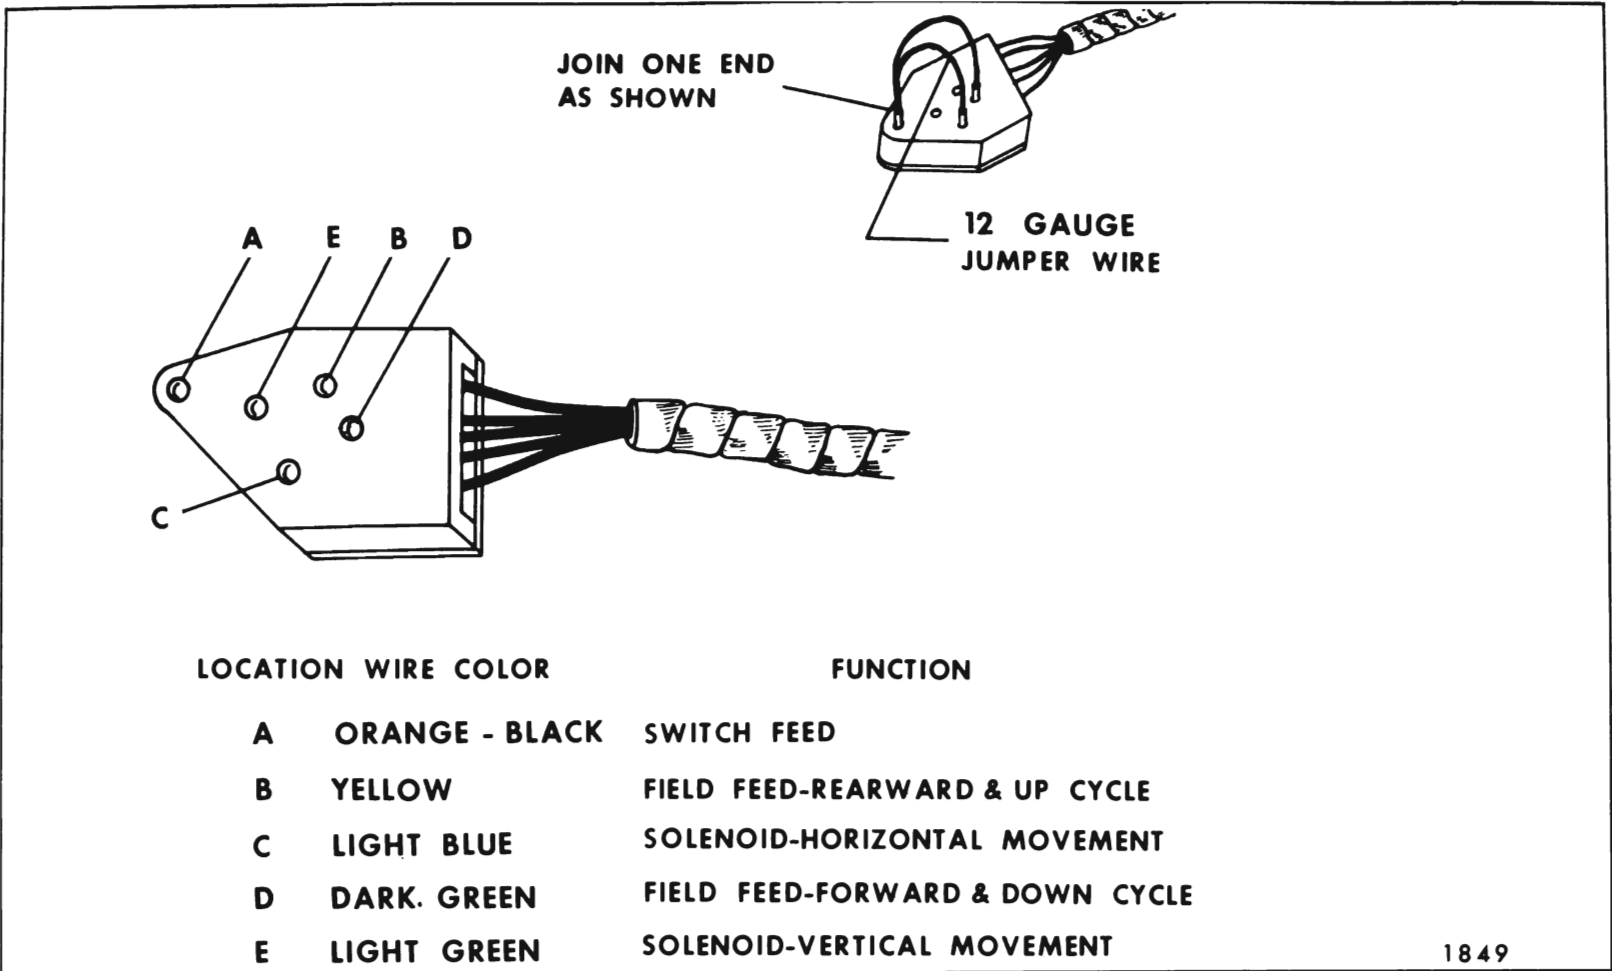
Four-Way Seat Switch Block - All Styles Except Oldsmobile "B & E"
